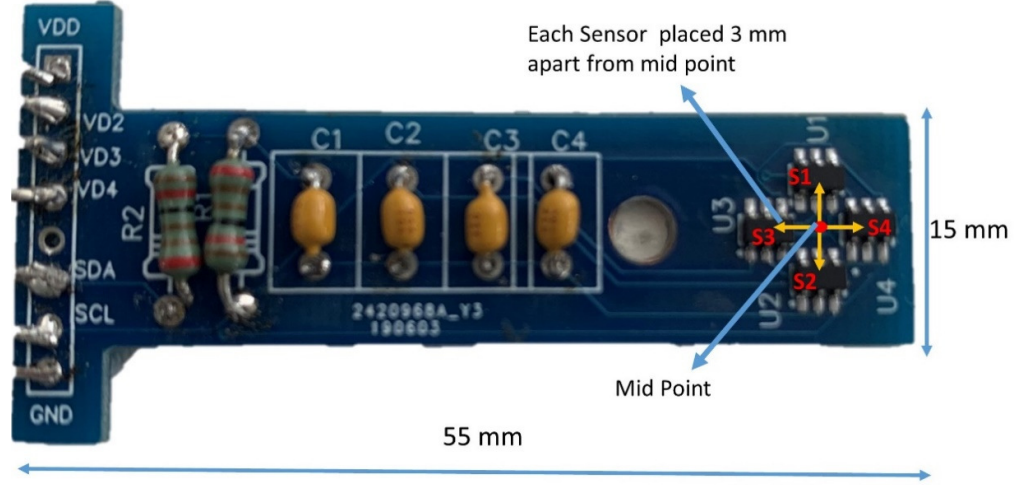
3: PCB layout of Quad sensor Configuration highlighting the position of the sensors and their auxiliary component.
